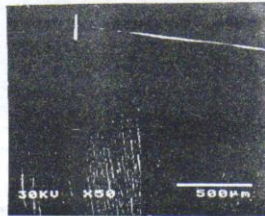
b. Tool nose wear for machining the matrix specimen at a cutting speed of 112 m/min, feed of 0.2 mm/rev and depth of cut 0.25 mm using a coated carbide tool.
